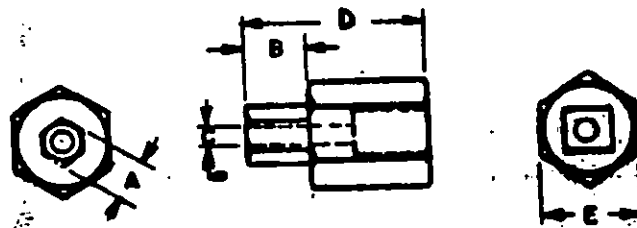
Type IV, class 3, style A attachments, socket wrench, internal (socket head set and cap screw), short bit point.
